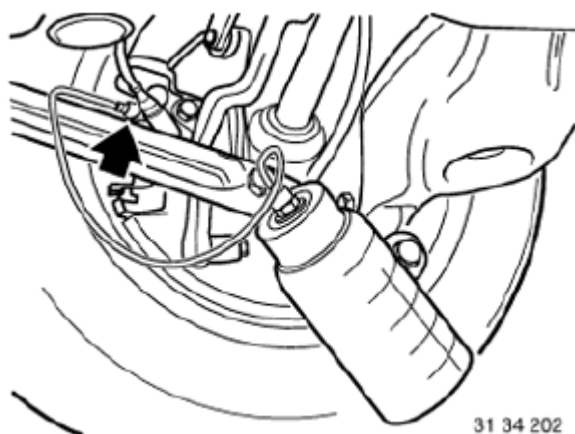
Connecting Bleeder Hose With Collecting Tray To Bleeder Valve
